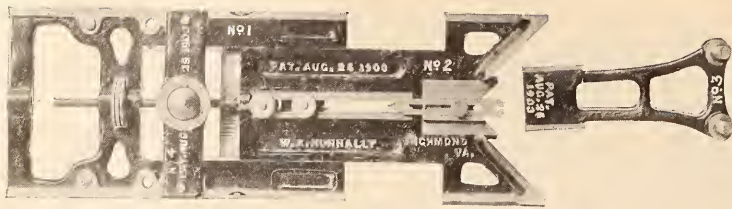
GAUGE FOR SETTING CRANK PINS.
